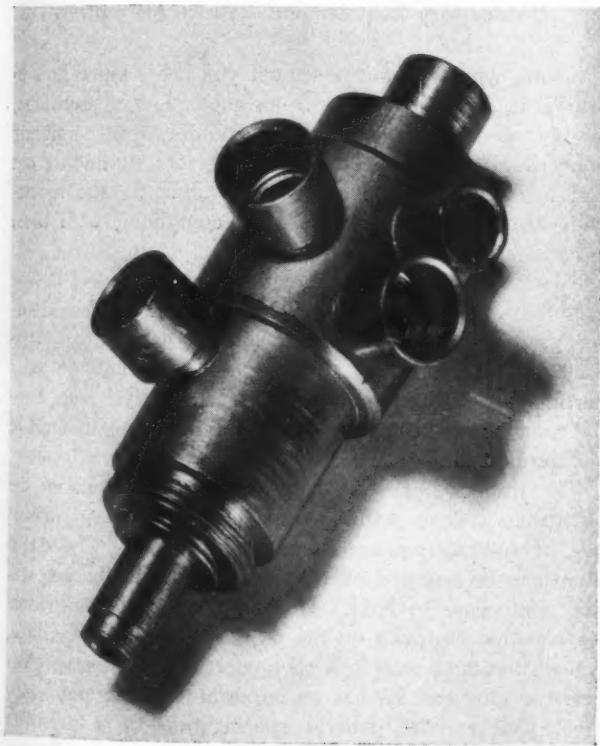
Valve built-up with brazed parts, effecting an economical assembly otherwise difficult to produce
